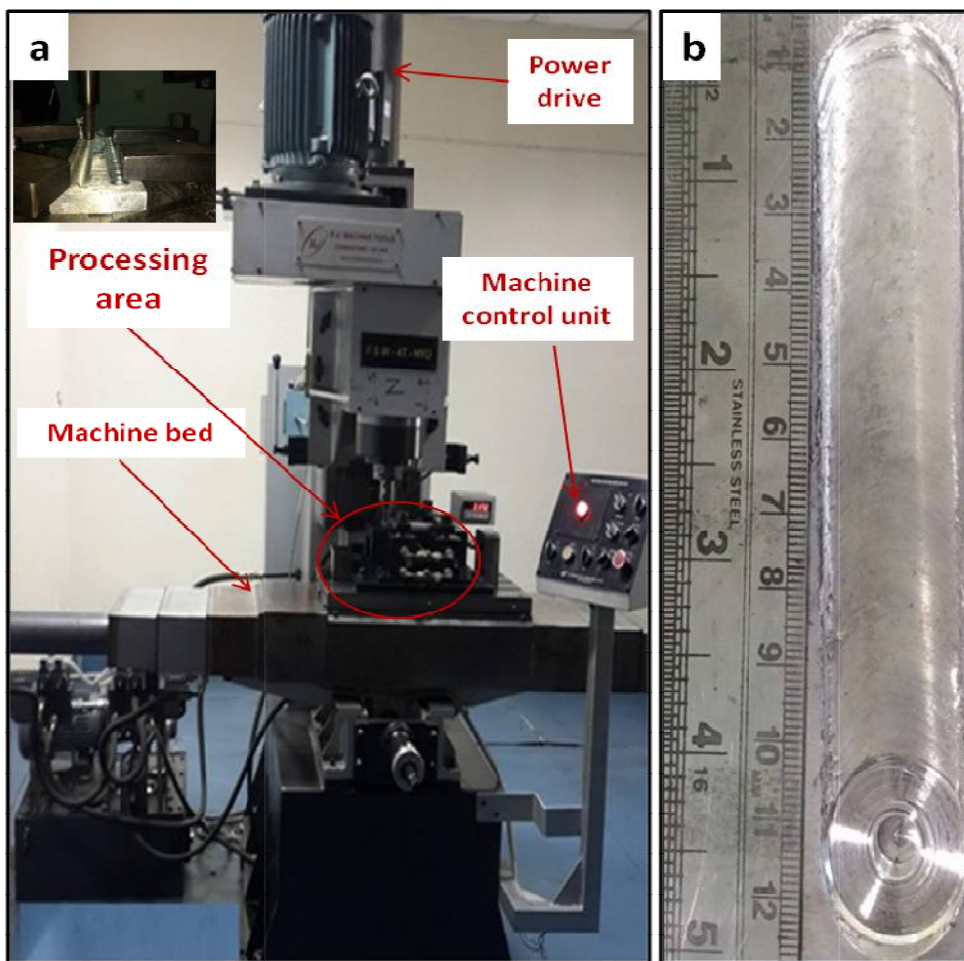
(a) FSW set up (R V machine tools, FSW-4T-HYD), (b) Surface appearance of the FSPed specimen
